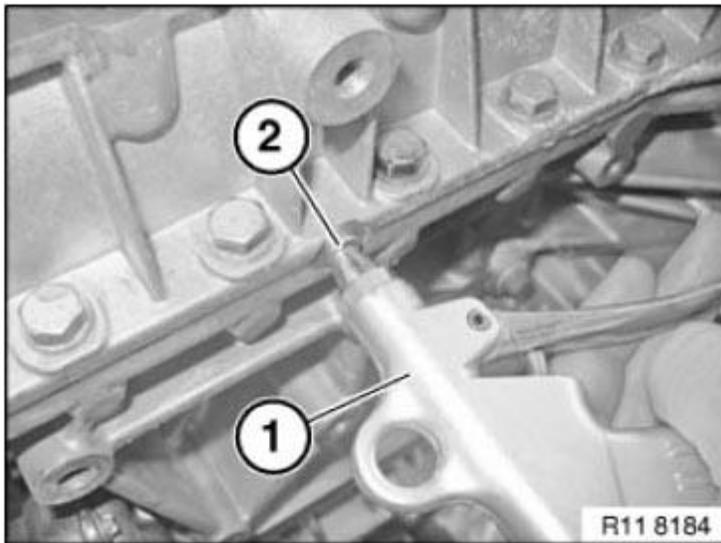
Blowing Compressed Air Into Injector Nozzle
